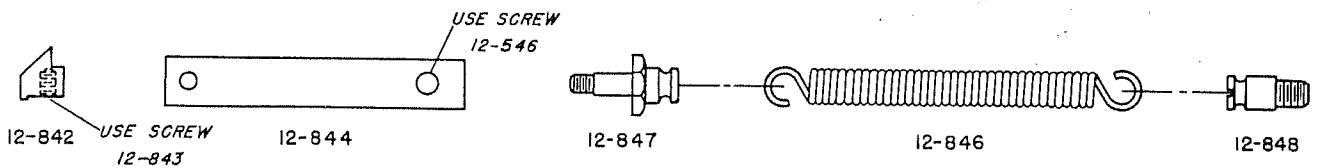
Push Back, Knife Holder and Knife, and Platform Parts (approximately 1/2 size)
